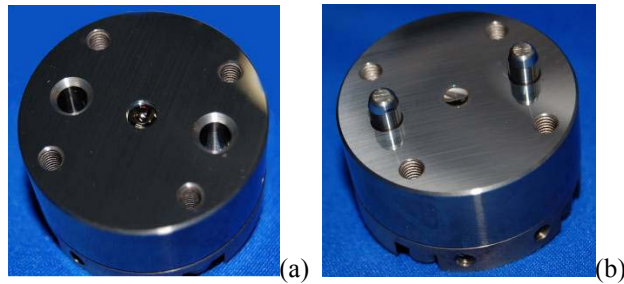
Photographs of the assembled molds: (a) upper mold, (b) lower mold.
